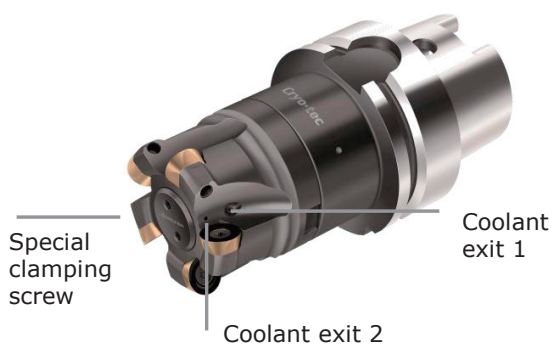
Design of Cryo-tecTM copy milling tool F2334R
